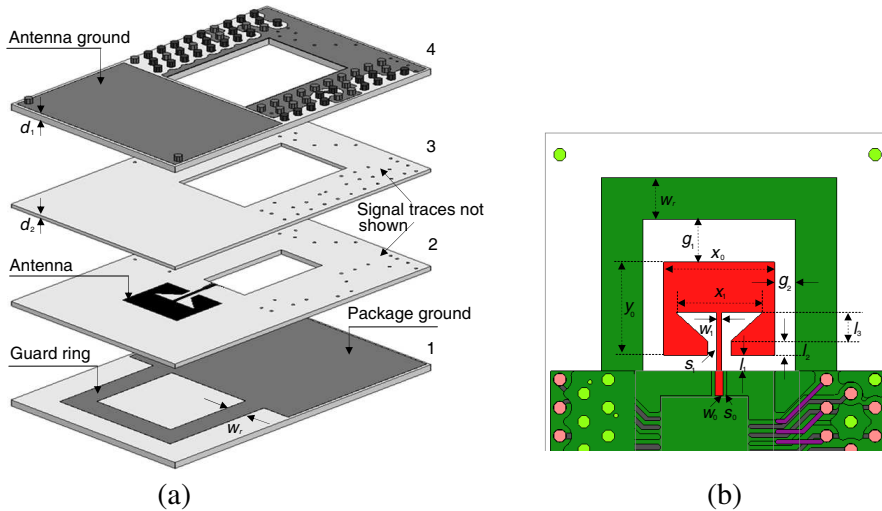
(a) Exploded view and (b) geometries and dimensions of the package.
